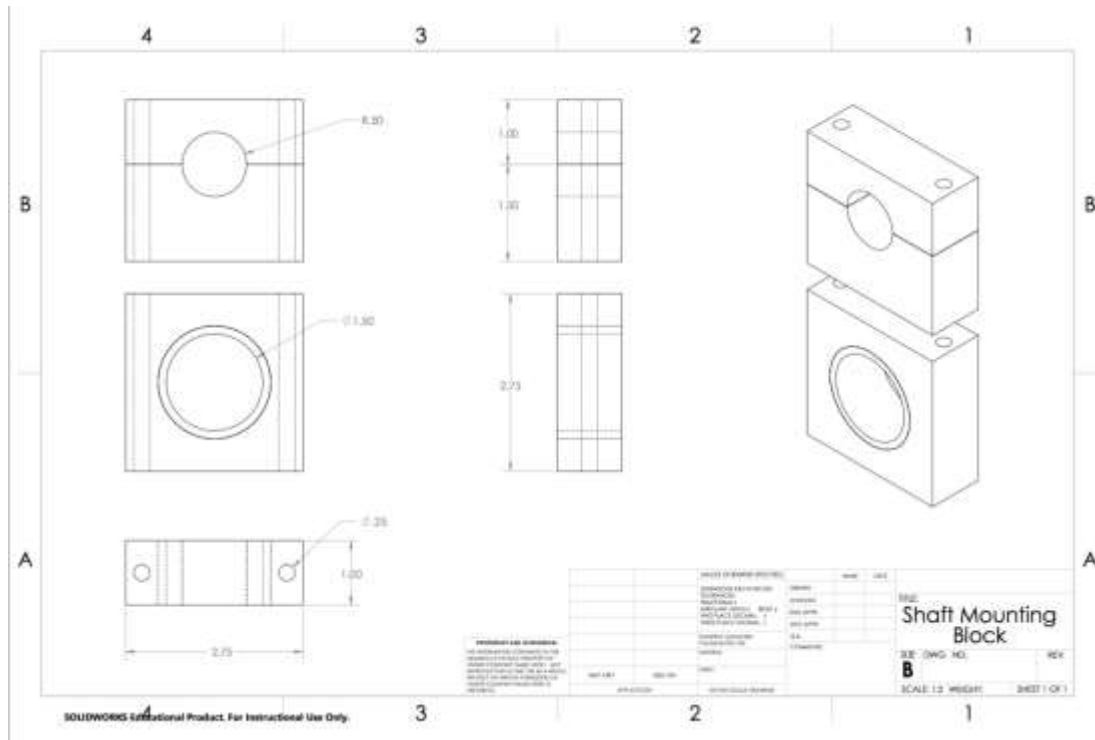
Drive Shaft Mounting Block Assembly Drawing
